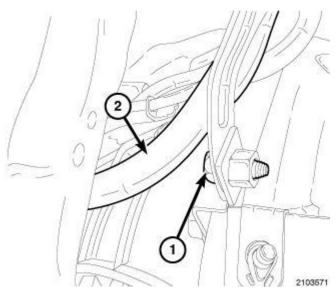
Transmission Fill Tube And Bolt Courtesy of CHRYSLER LLC
